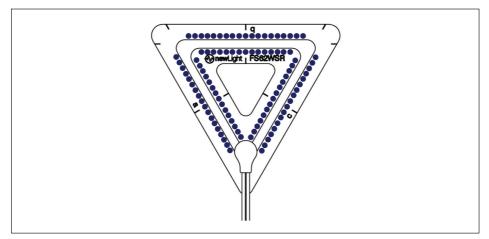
FS62WSR BRD finished welding pattern.
